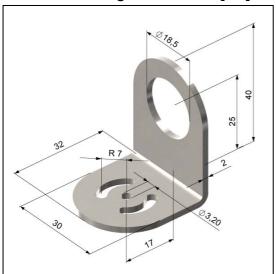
Mounting bracket, adjustable in one axis for HS [TM-FBMH-CT]
